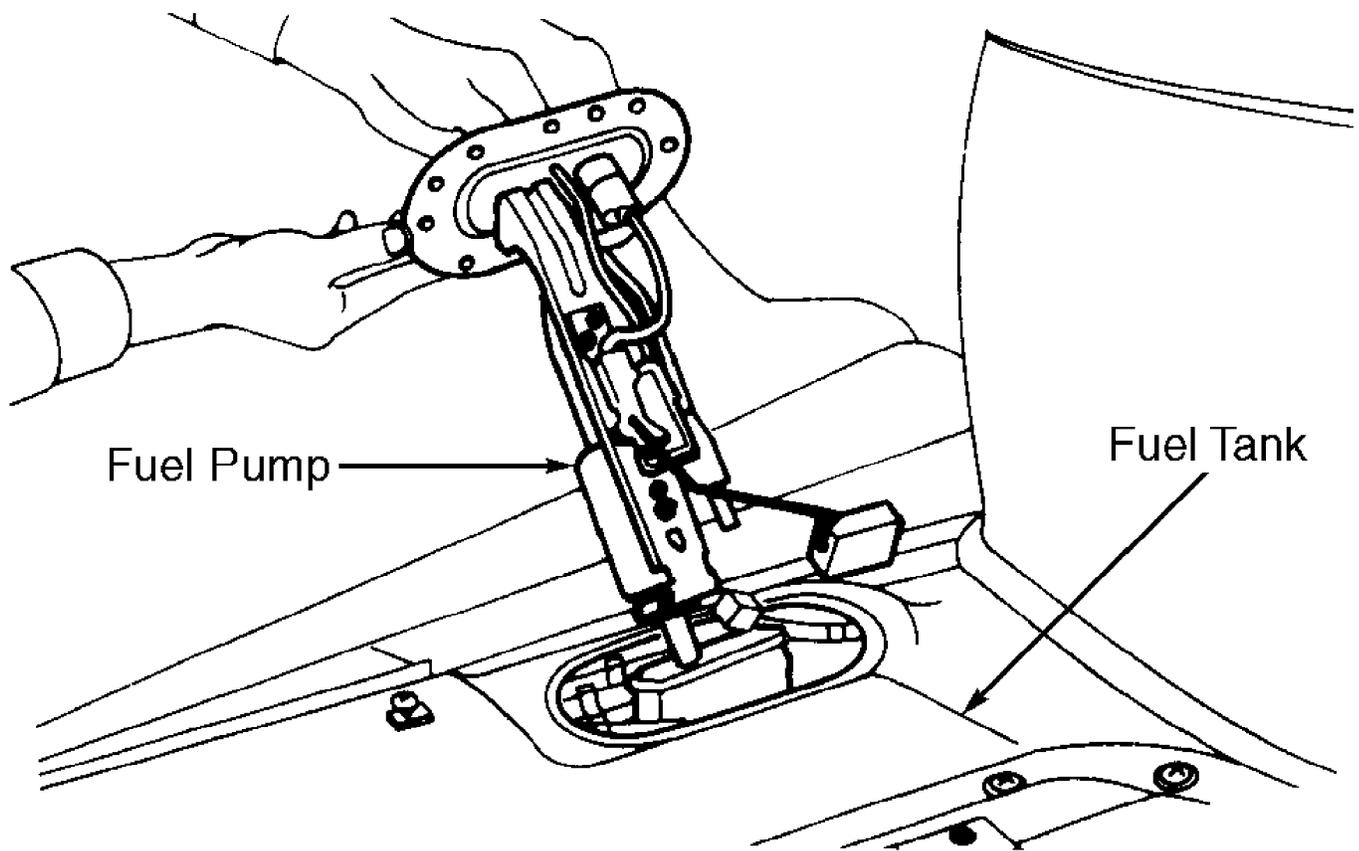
Locating Fuel Pump (Justy Carbureted)
